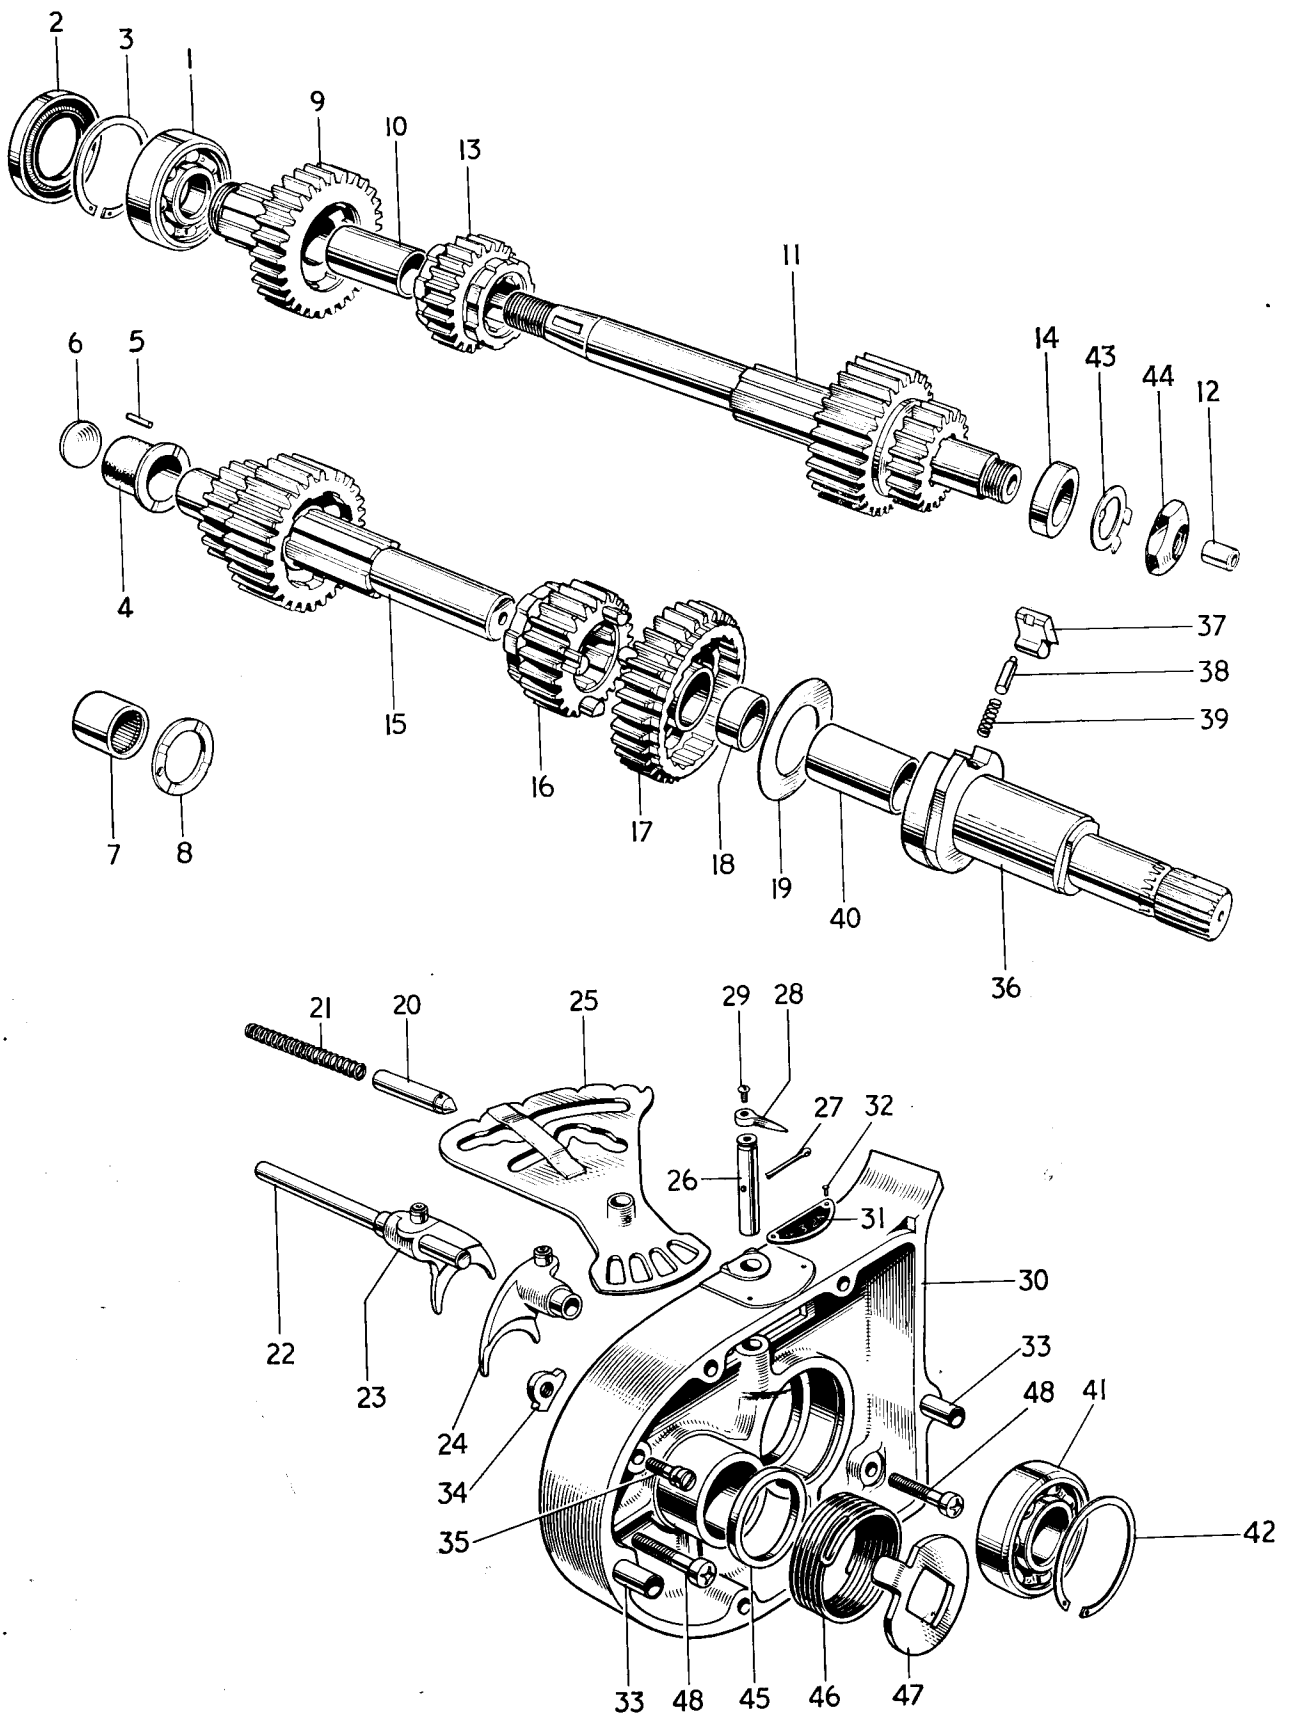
GEARBOX SHAFTS, BEARINGS AND INNER COVER
